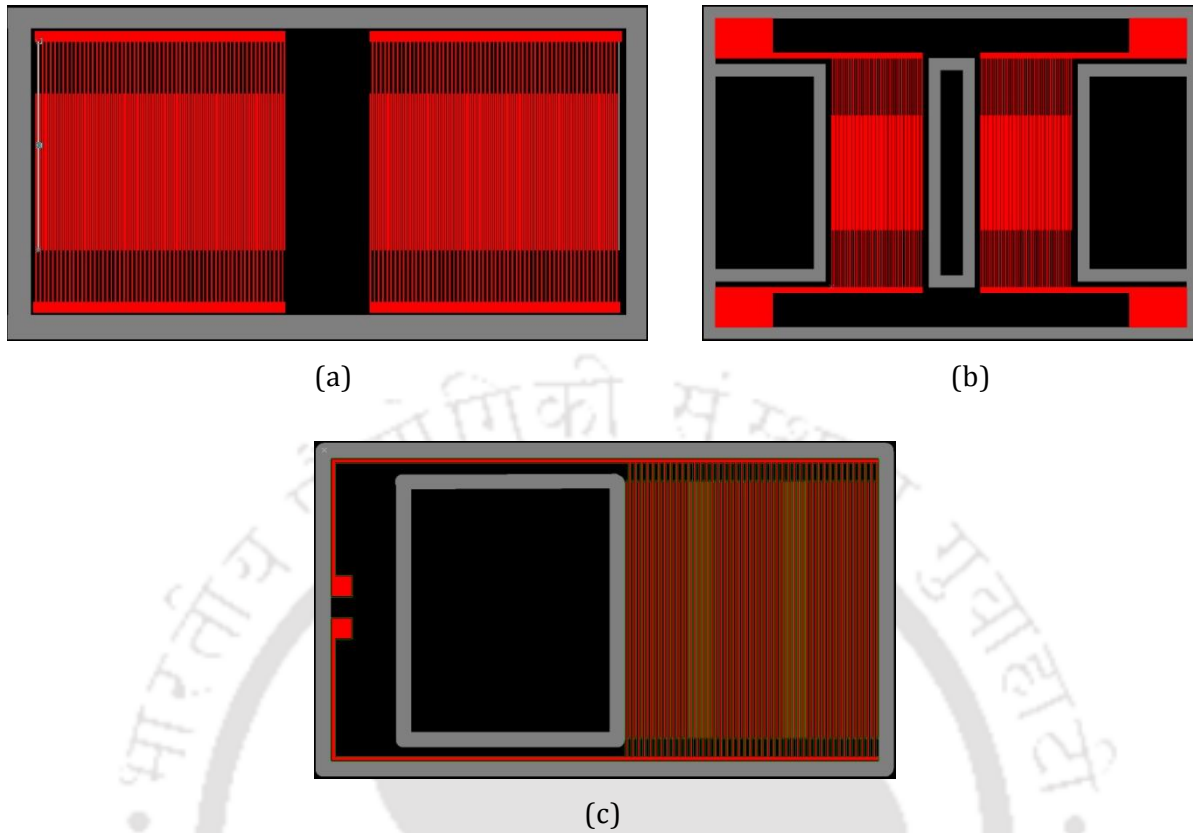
(a), (b) and (c) Layout for various NCIDTs designed using CircuitCAM 3.5 software and to be fabricated on copper clad FR4 sheet using LPKF PCB prototyping machine. Note: red color shows the top layer for milling tools with micro cutter of 0.1– 0.2 mm and gray color shows the outline for cutting using contour router of 2 mm.
